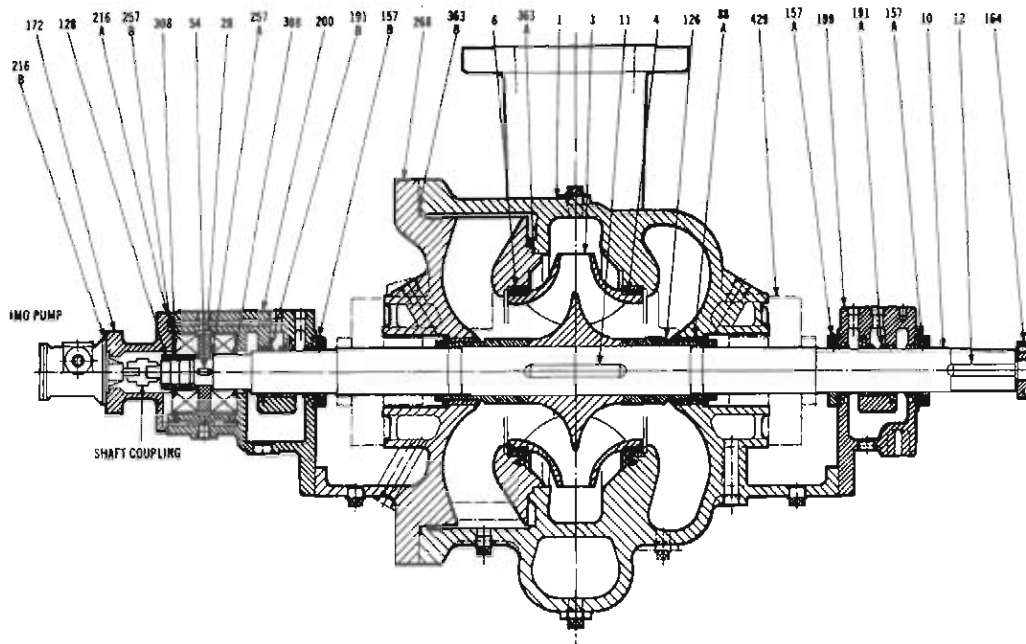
Double suction axially-split pump with sleeve bearings and tilting pad thrust
